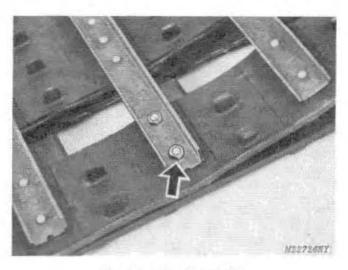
Installing Grouser Bar (Track Removed for Photo Purposes)
